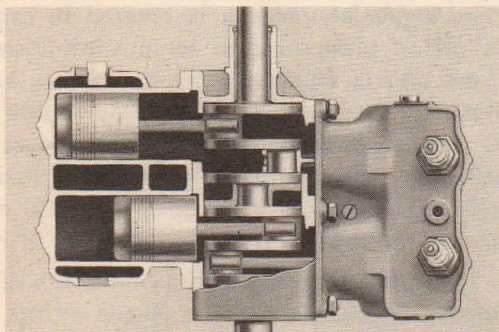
, 4 and 5 show typical Evinrude and Elto power head assemblies of connecting rods, pistons, crankshaft and crankcase.
